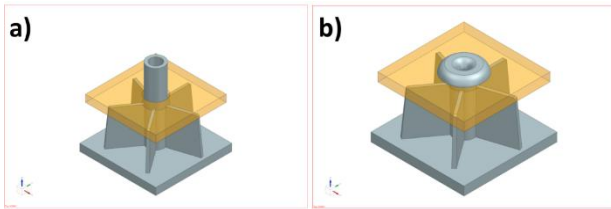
Traditional coupling geometry, a) pre-welding and b) post-welding
